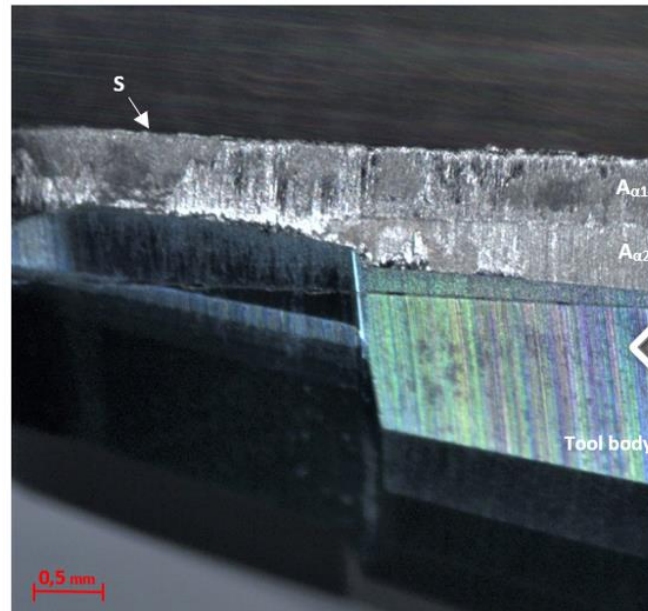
Detailed Flank Face of DP End Mill After 24 Passes.
